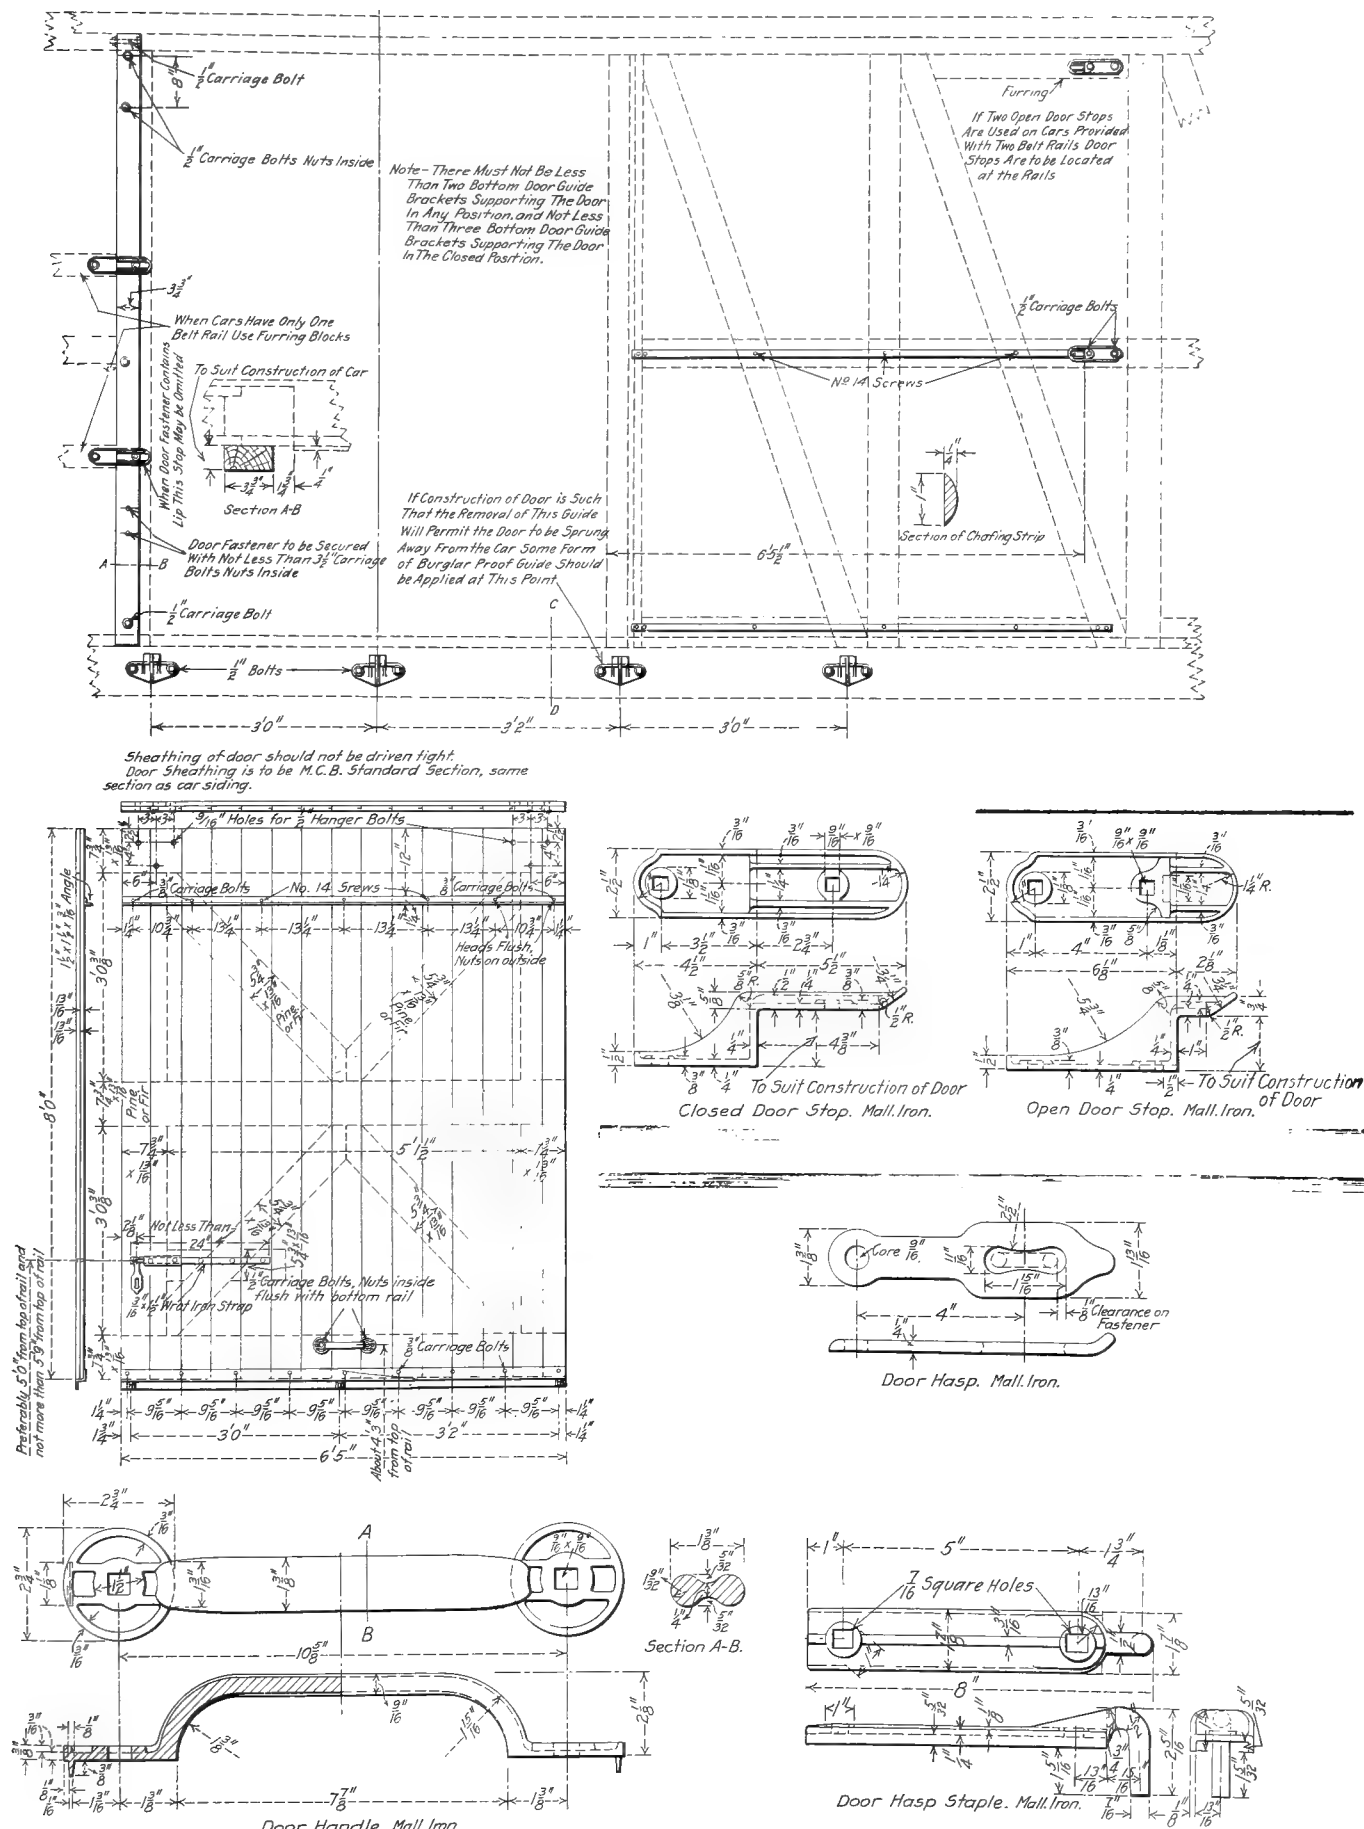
M. C. B. Standard Outside Hung Box Car Side Door and Details. (M. C. B. Sheet 30.) See also Fig. 2897.
